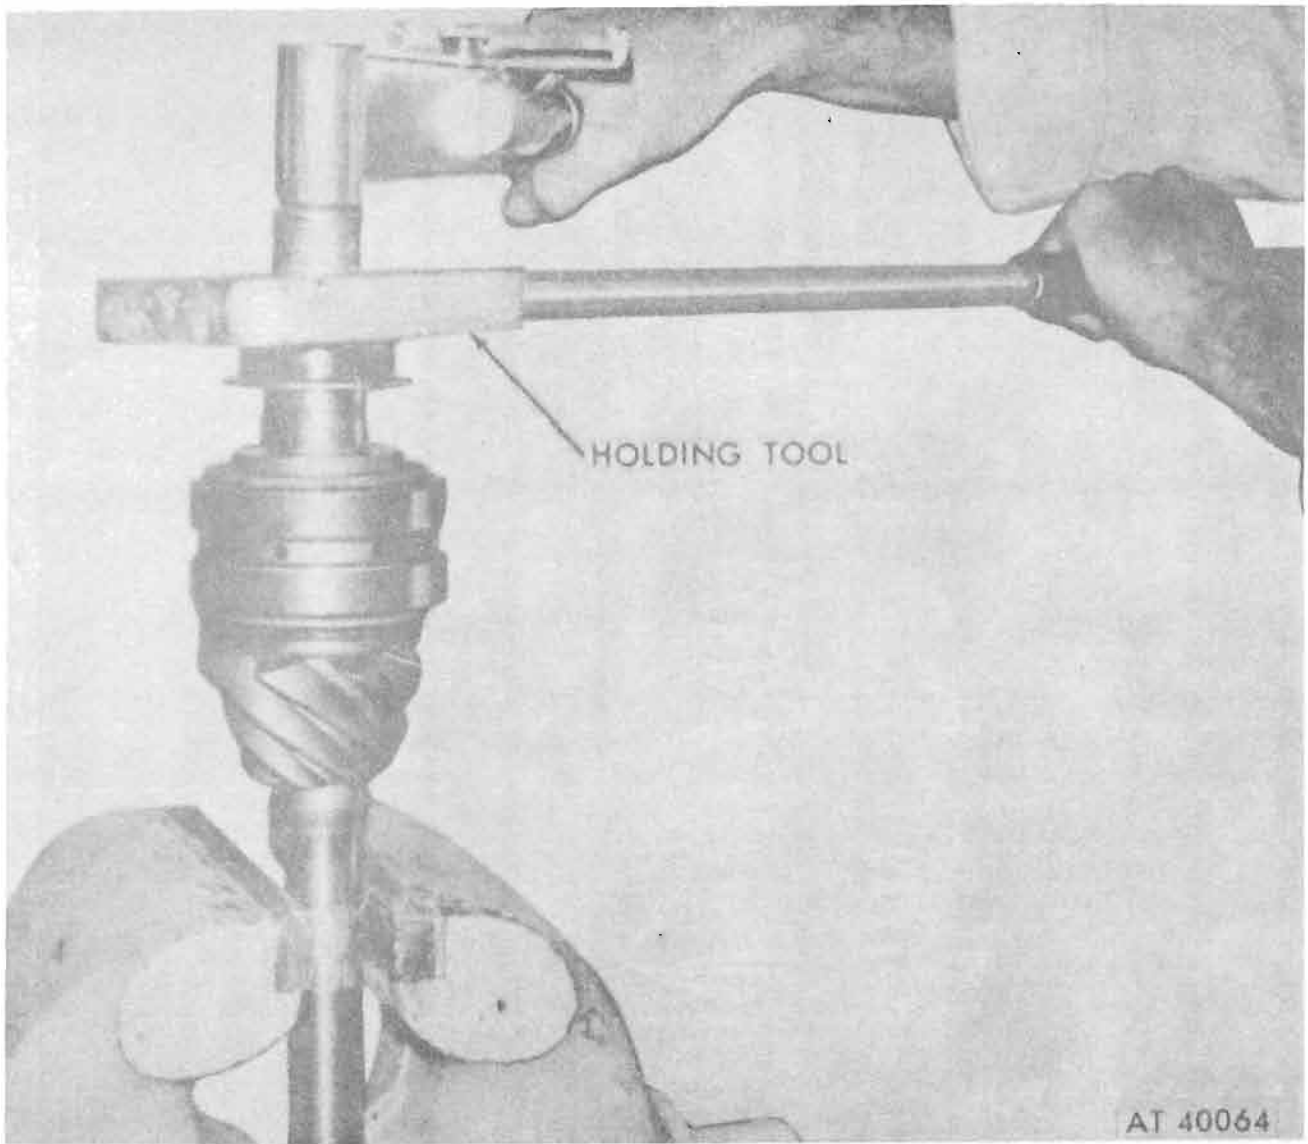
Installing front drive flange, washer, and nut on pinion shaft.
